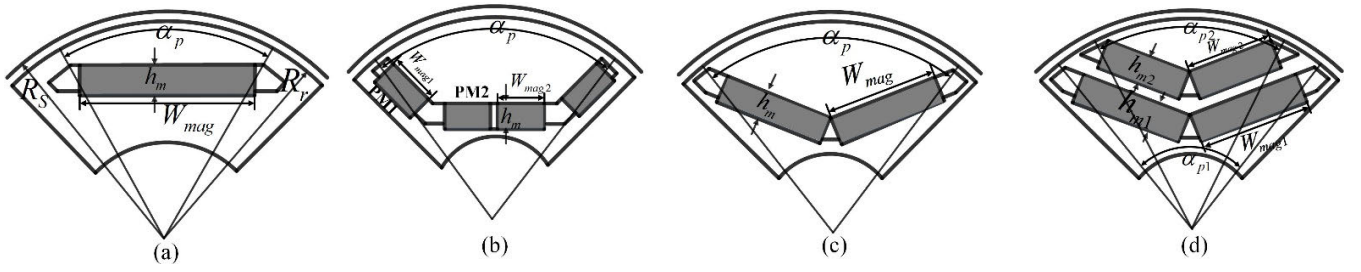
Rotors of the IPM machines. (a) Tangentially IPM. (b) Multi-segment tangentially IPM. (c) Single-layer V-shaped IPM. (d) Double-layer V-shaped IPM.
